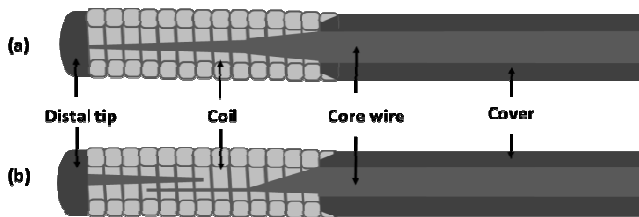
Standard commercial guidewire designs, (a) fixed core guidewire (b) movable core guidewire
